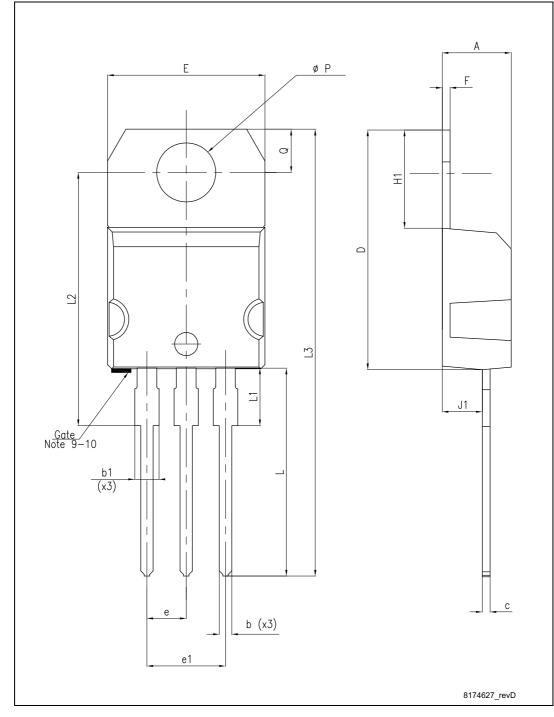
Drawing dimension TO-220 (type STD-ST Single Gauge)
